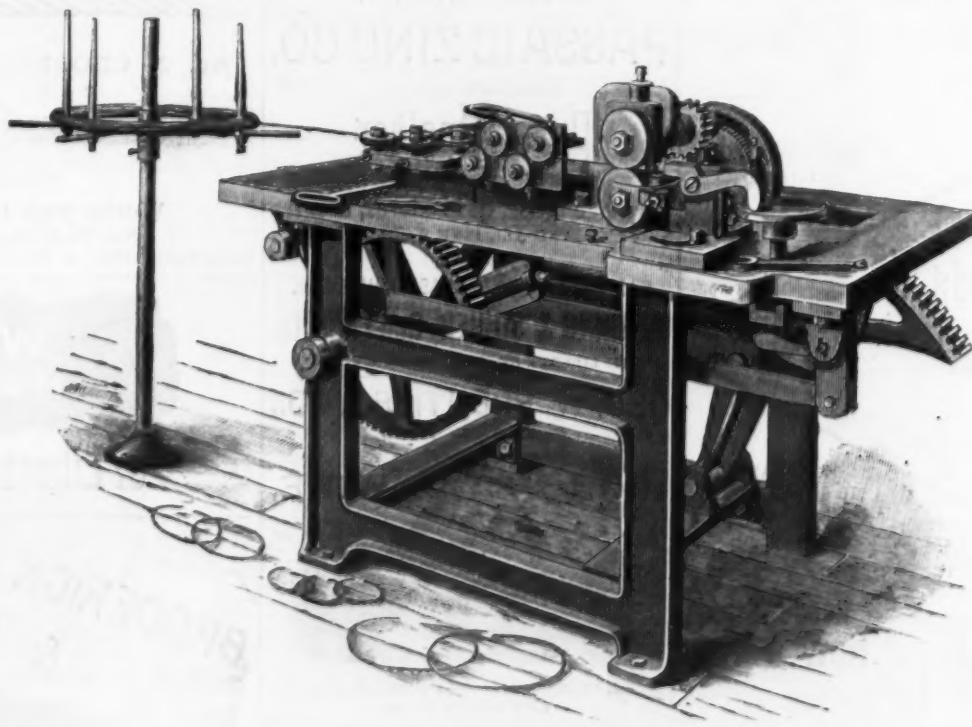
Automatic Wire Forming and Cutting Machine.
